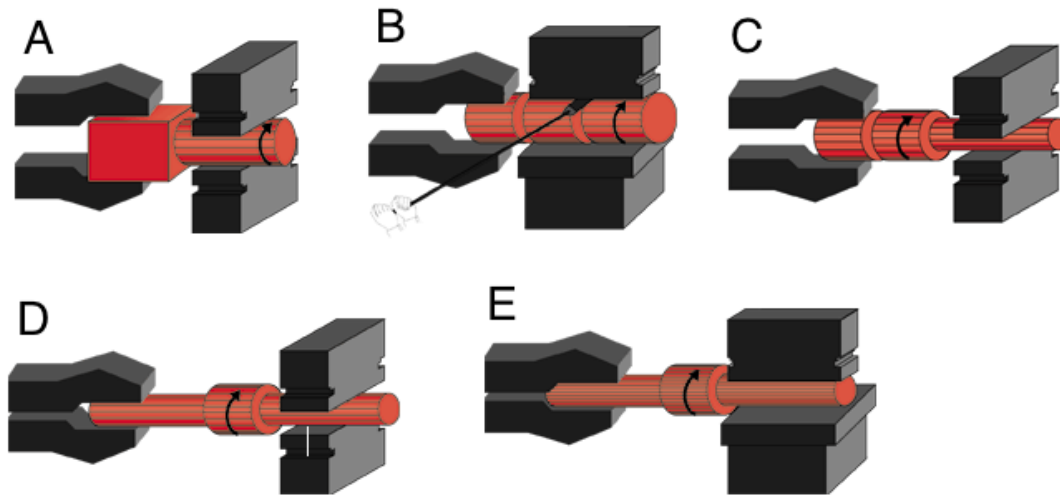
The basic steps of open die forging are detailed in this schematic drawing (3).
